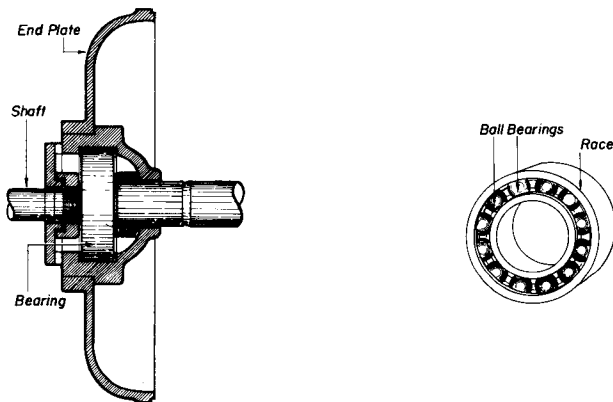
The ball bearing at right mounted in the end plates as shown.
